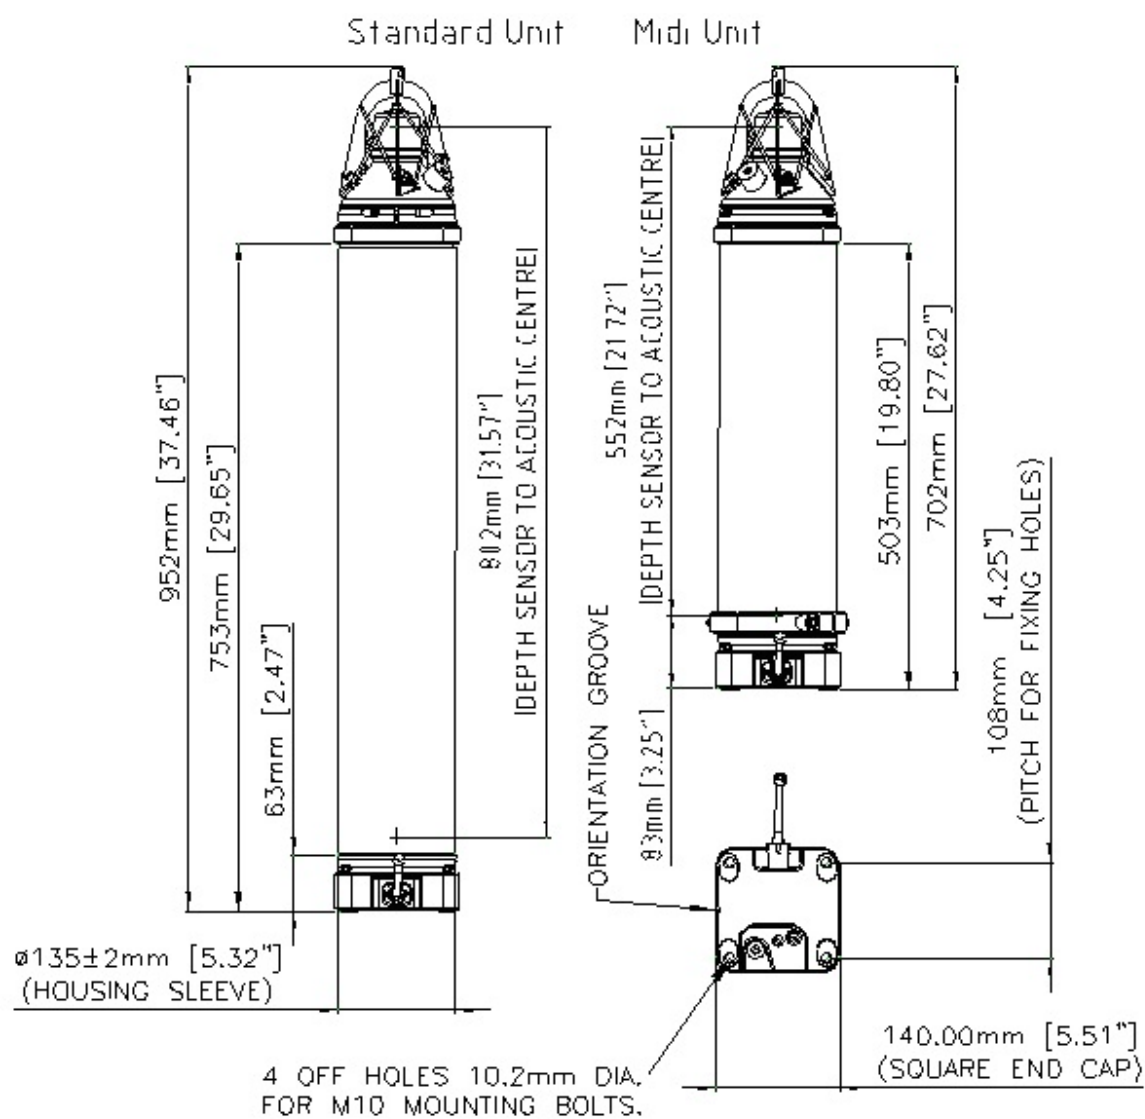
OUTLINE DRAWING: INCLINOMETER TRANSPONDERS
